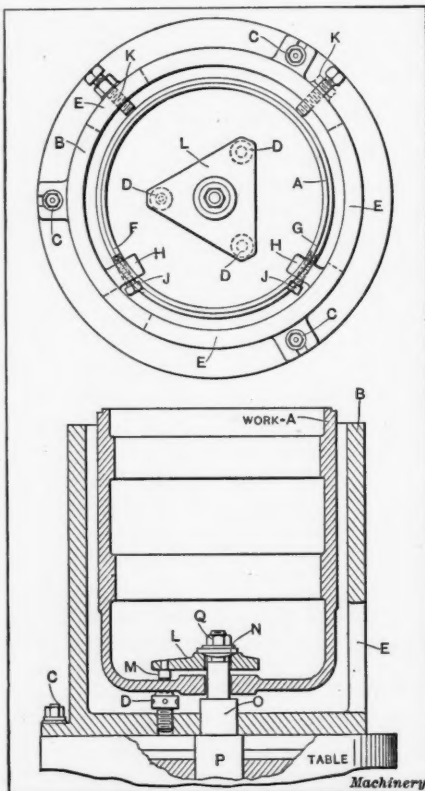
Pot Casting Fixture for holding Steel Castings on Vertical Turret Lathe
